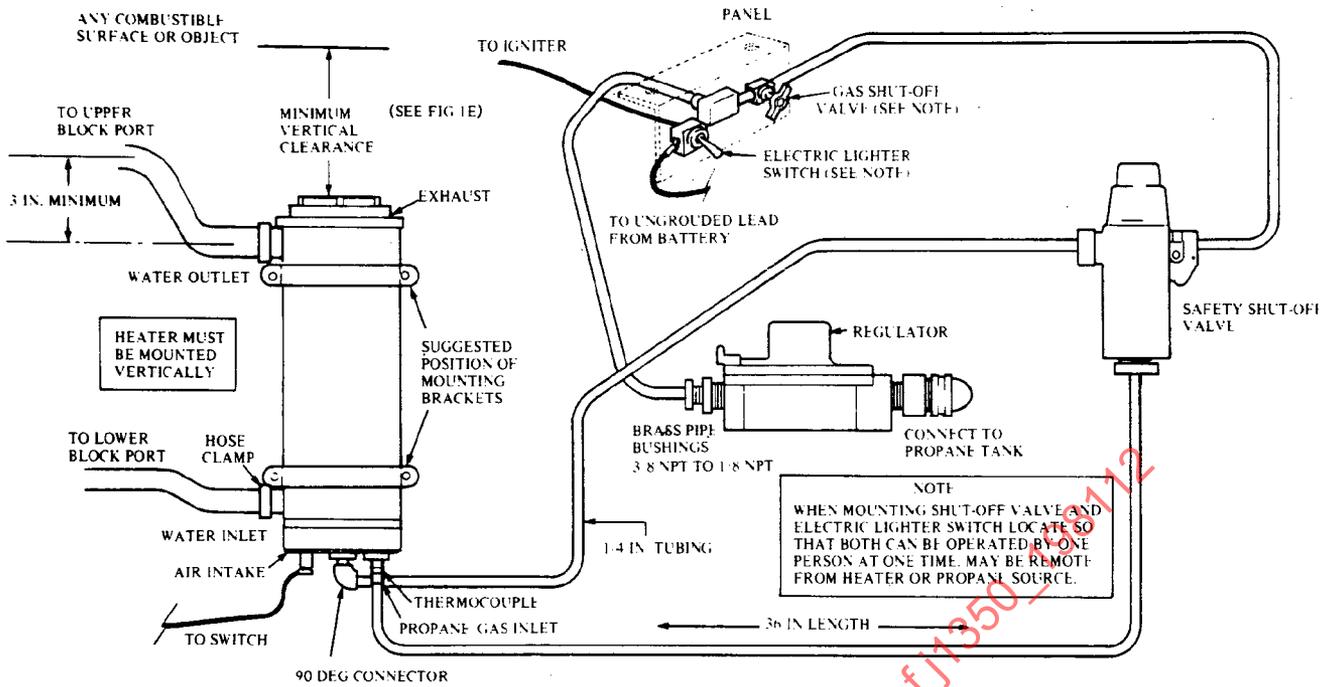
TYPICAL PROPANE HEATER INSTALLATION
